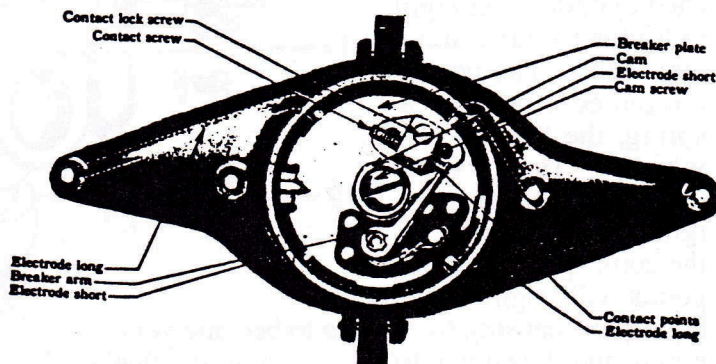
Top view of timer-distributor showing the breaker-contact (interrupter) mechanism and distributor electrodes. The distributor cap and rotor are removed.
